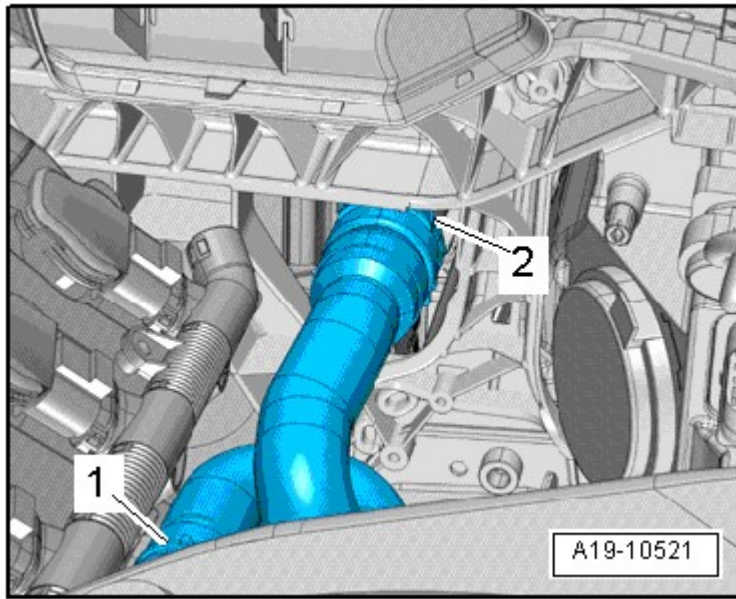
Identifying Coolant Hose From Radiator And Right Coolant Pipe, Removal
